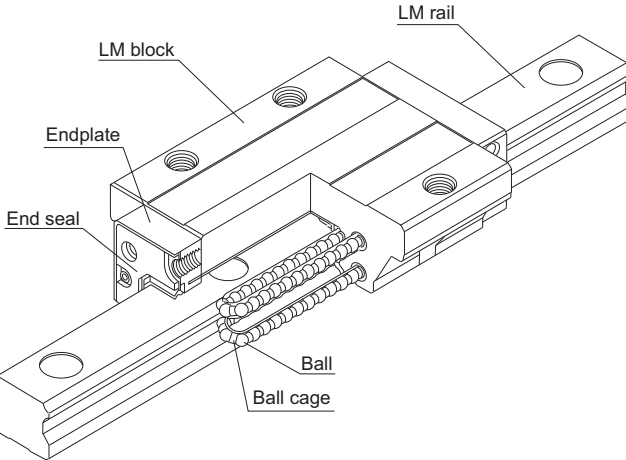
Structural Drawing of the Caged Ball LM Guide Model SHS
